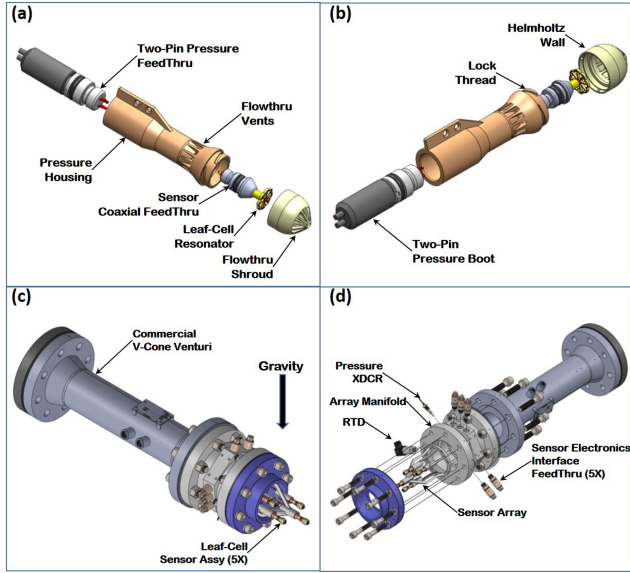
Sensor array description. (a) and (b) Sensor assembly exploded views. (c) and (d) Sensor array assembly for flow loop tests.
